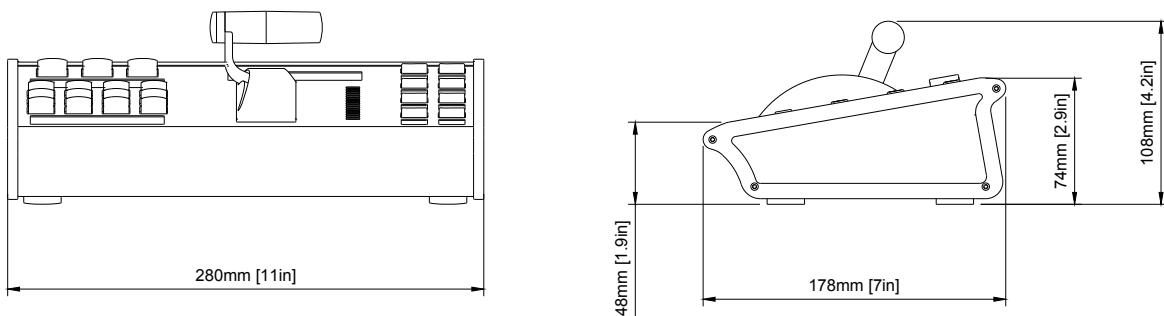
Technical drawing of T-Block Left with key dimensions and layout details.
